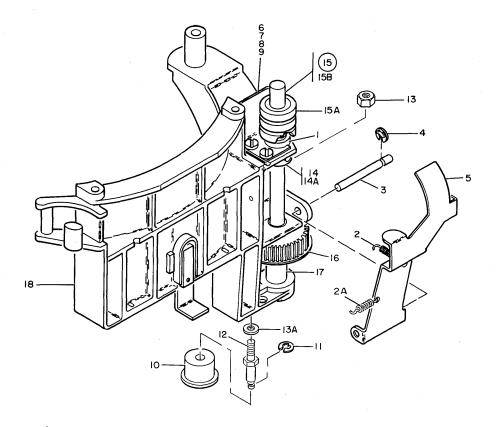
RIBBON DRIVE ASSEMBLY.
